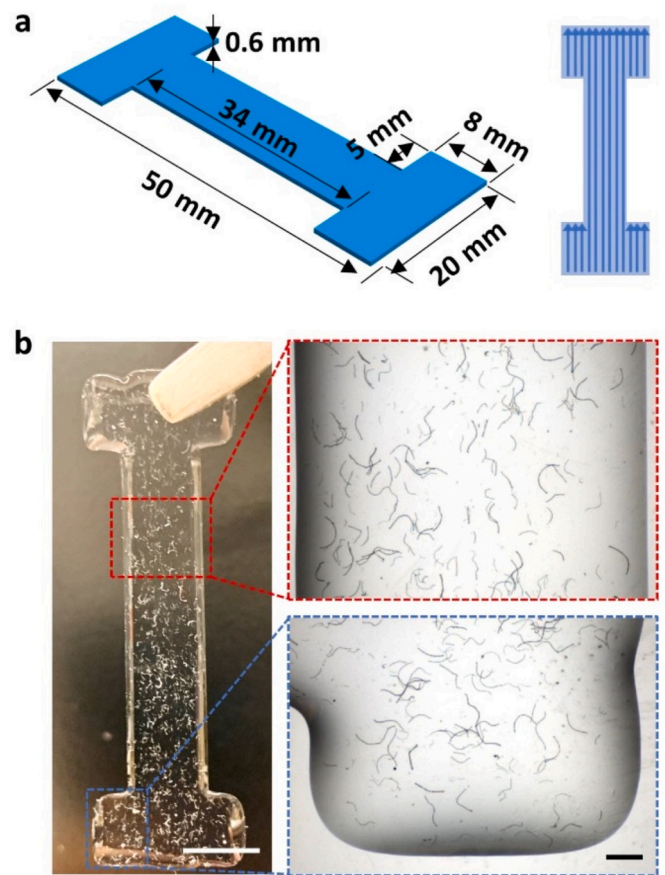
Geometry and fabrication process of specimens. (a) Mechanical test specimen geometry and fabrication pattern. (b) Images of printed specimen, left scale bar = 10 mm, right scale bar = 2 mm.
